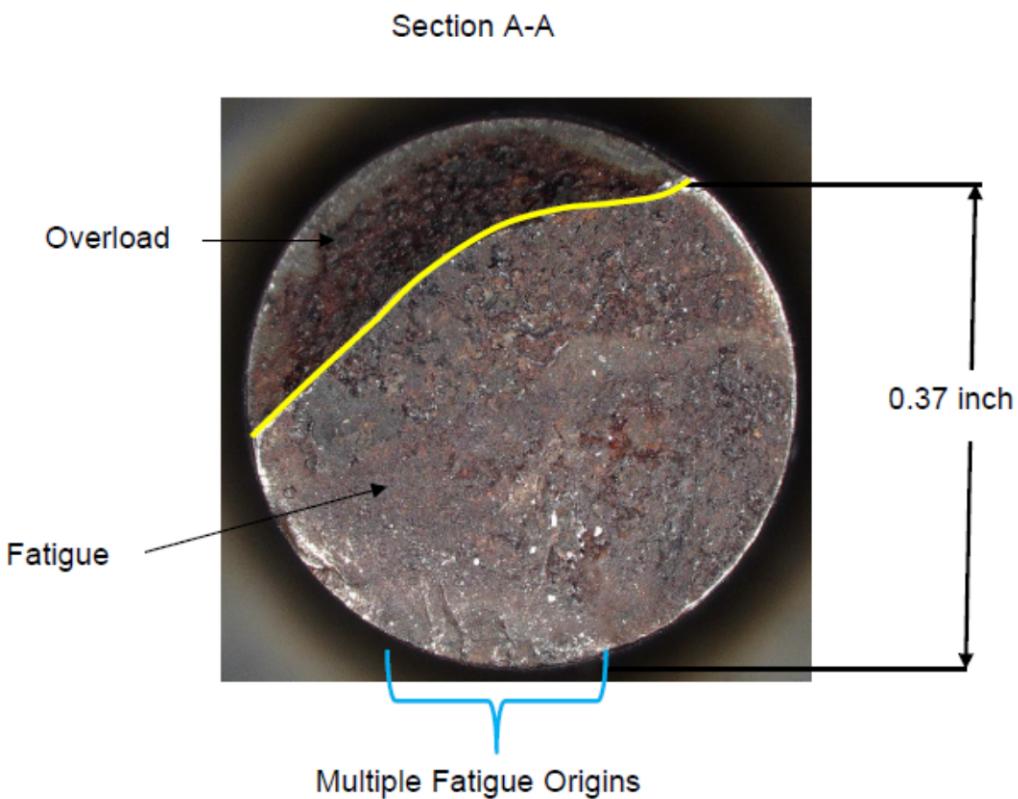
The fracture surface of the upper-left attachment bolt. (Image courtesy of Bell)
